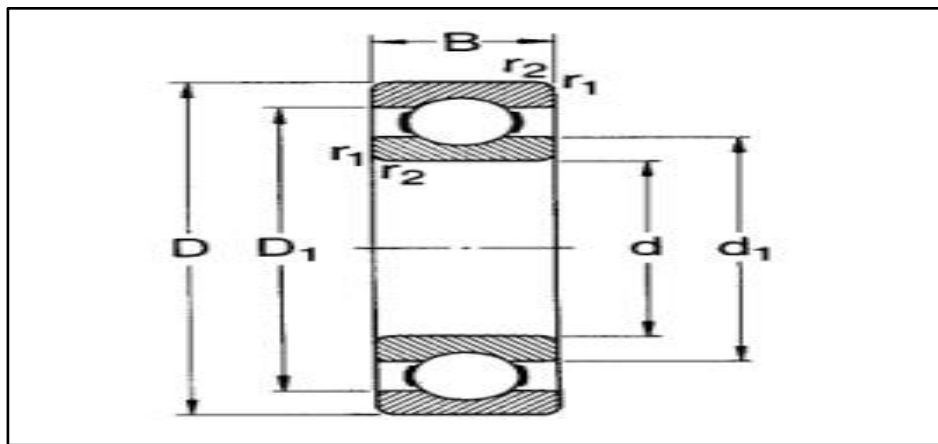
Single Row Deep Groove Ball Bearing with Full Outer Ring Shoulders
